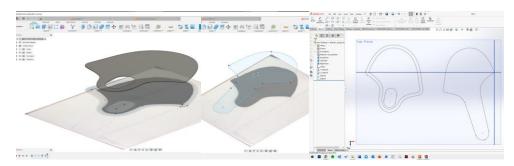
Fusion 360 and SolidWorks flat pattern CAD geometry modelling.
